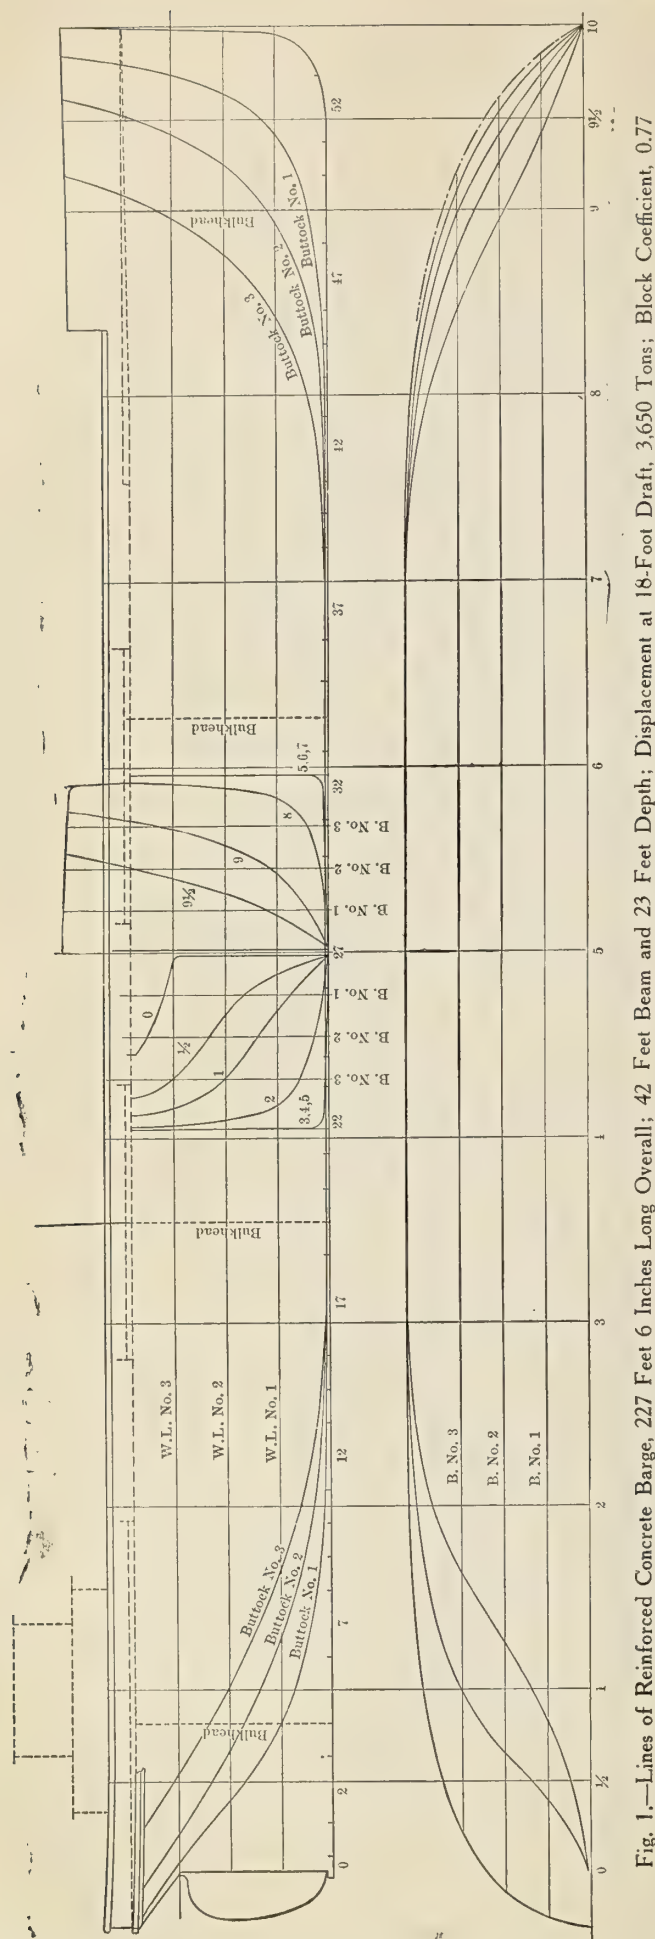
Lines of Reinforced Concrete Barge, 227 Feet 6 Inches Long Overall; 42 Feet Beam and 23 Feet Depth; Displacement at 18-Foot Draft, 3,650 Tons; Block Coefficient, 0.77
